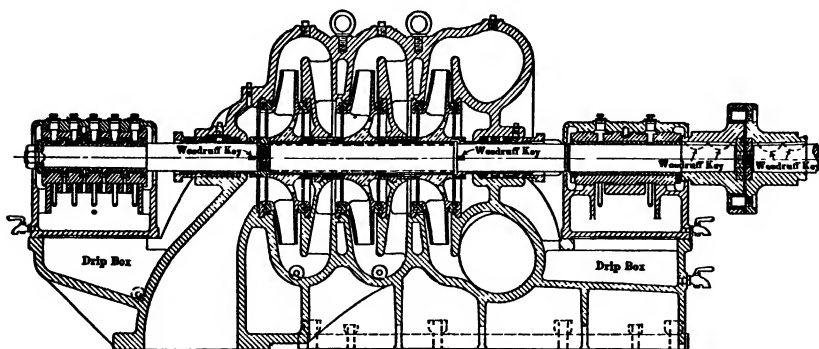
Typical section of De Laval multi-stage centrifugal pump.
